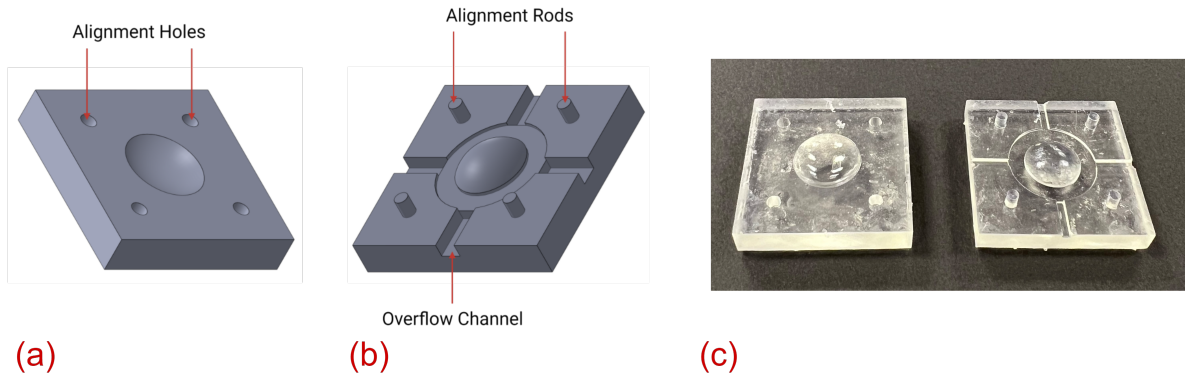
3D CAD model of the (a) top mold, (b) bottom mold, and (c) 3D-printed parts in Formlabs Clear resin.
